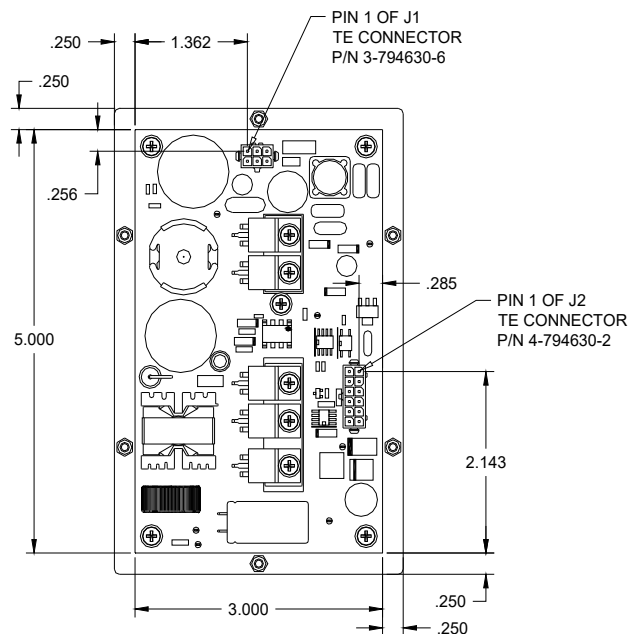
DETAIL DIMENSIONS MOUNTING HOLES AND CONNECTORS
